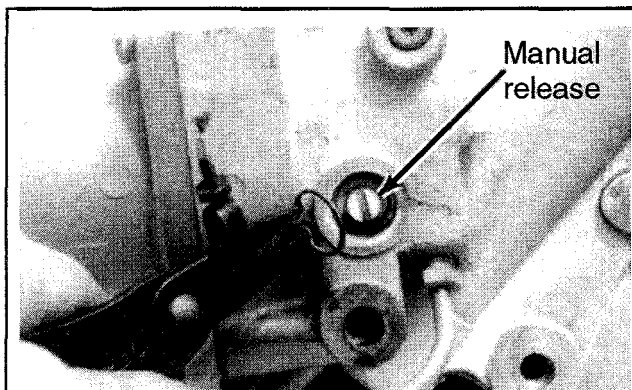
Remove the manual release valve, followed by all necessary external valves
